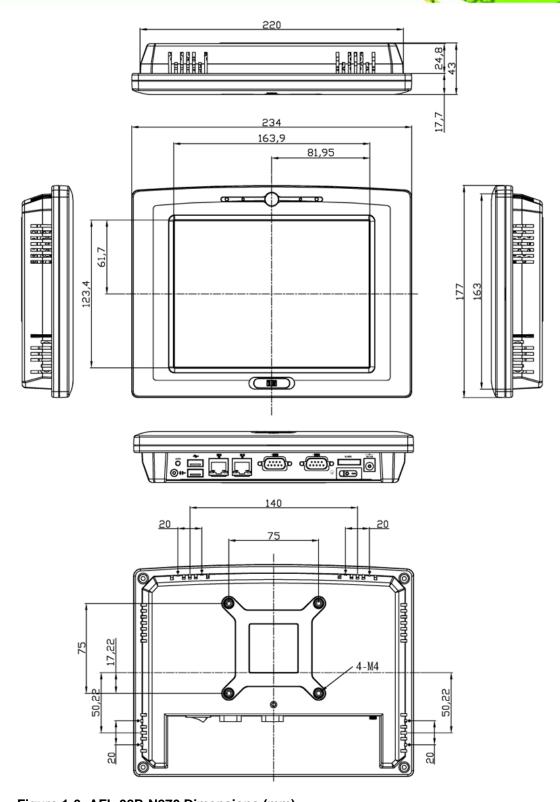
AFL-08B-N270 Dimensions (mm)
